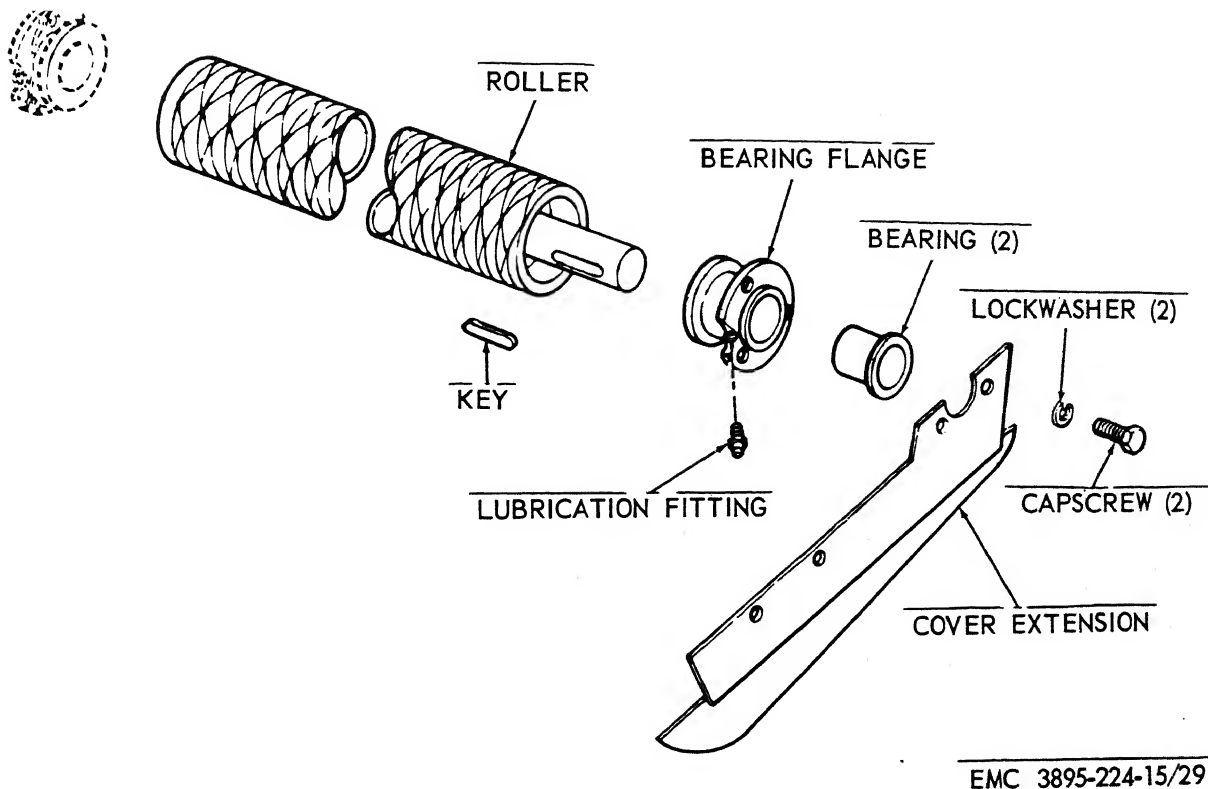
Roller assembly, disassembly and reassembly, exploded view.
